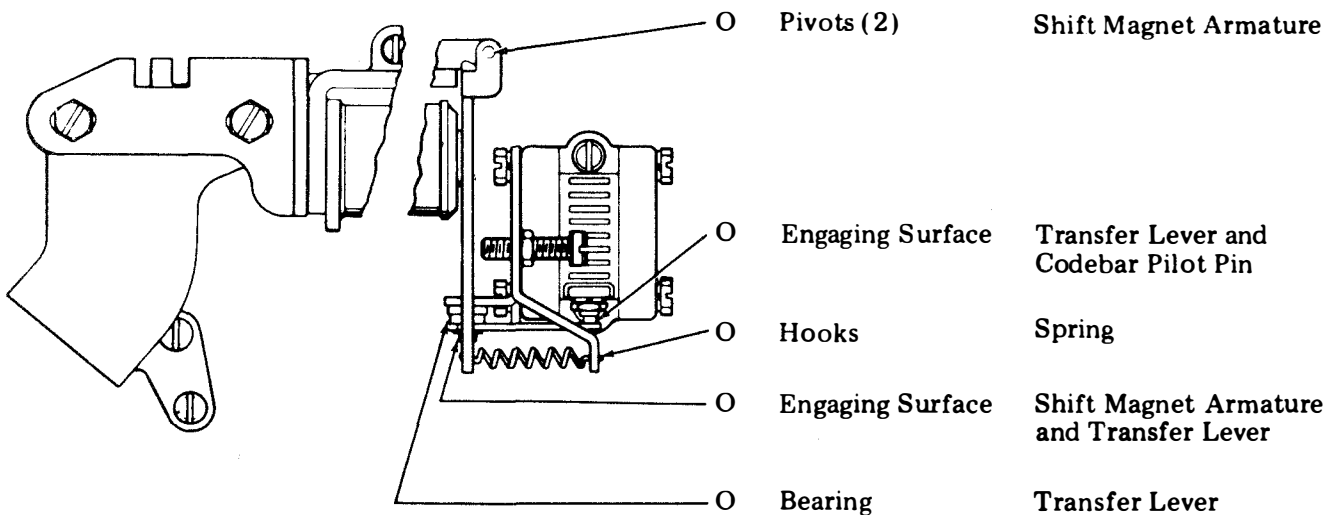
LETTERS-FIGURES Code Bar Shift Magnet Mechanism, Left Side View
